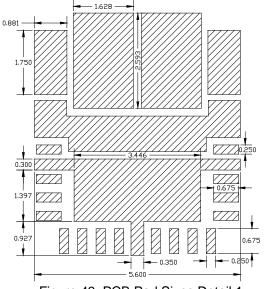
PCB Pad Sizes Detail 1 (Dimensions in mm)
